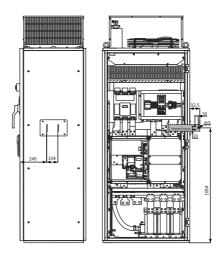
Dimensions of the position for installing the adapter busbar (unit: mm)
